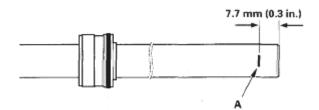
Separating Cylinder End Seal From Cylinder End Seal Slider Courtesy of AMERICAN HONDA MOTOR CO., INC.
